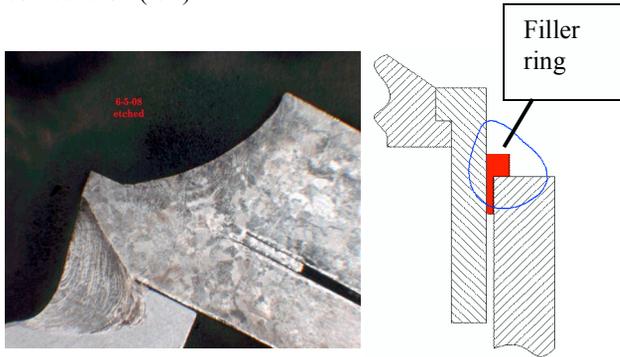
Drawing on the right shows titanium filler ring inserted in the gap between the spacer ring and the inner wall of the helium vessel shell. On the left is the TIG fillet weld sample generated using final weld parameters.
